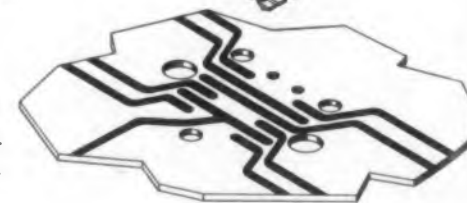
Typical printed circuit board conductor configurations for Printact relay.
